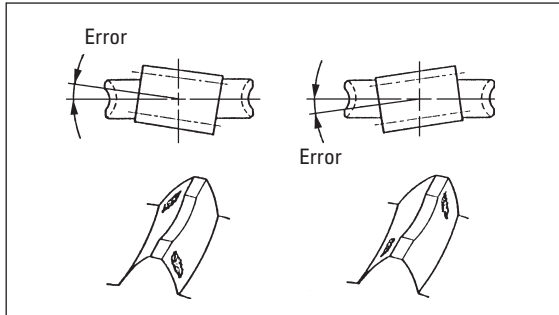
Poor Contact Due to Shaft Angle Error
